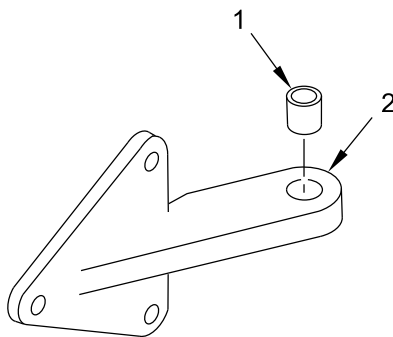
Ramp Access Door Hinge Bearings – Removal.
